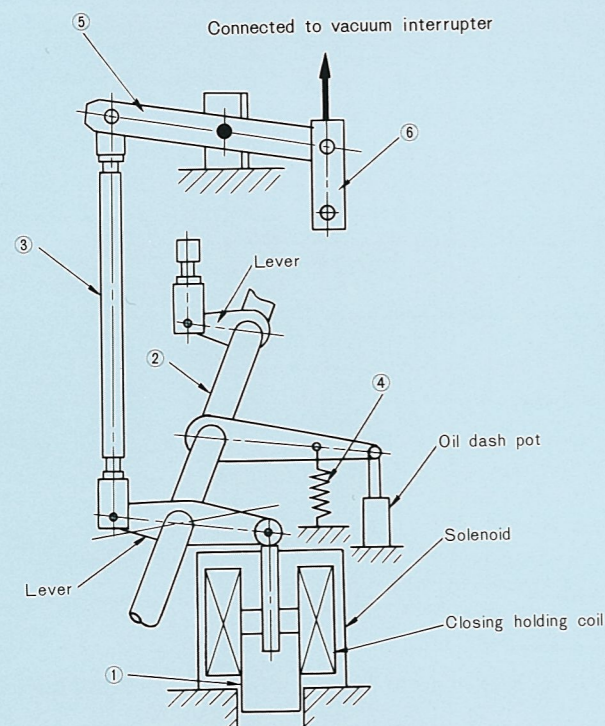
Structural drawing of operating mechanism (showing the open condition)
